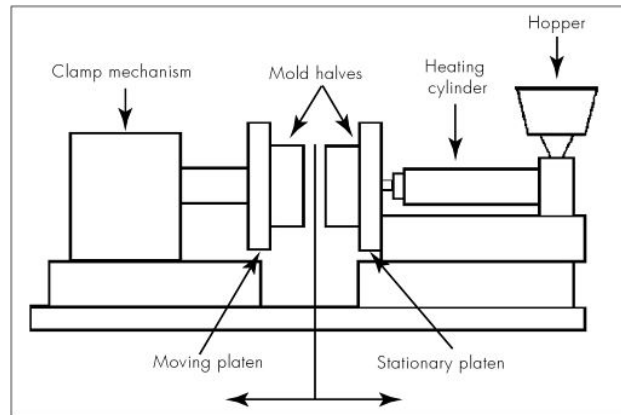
Moulding Machine Layout (Bryce, 1996)
